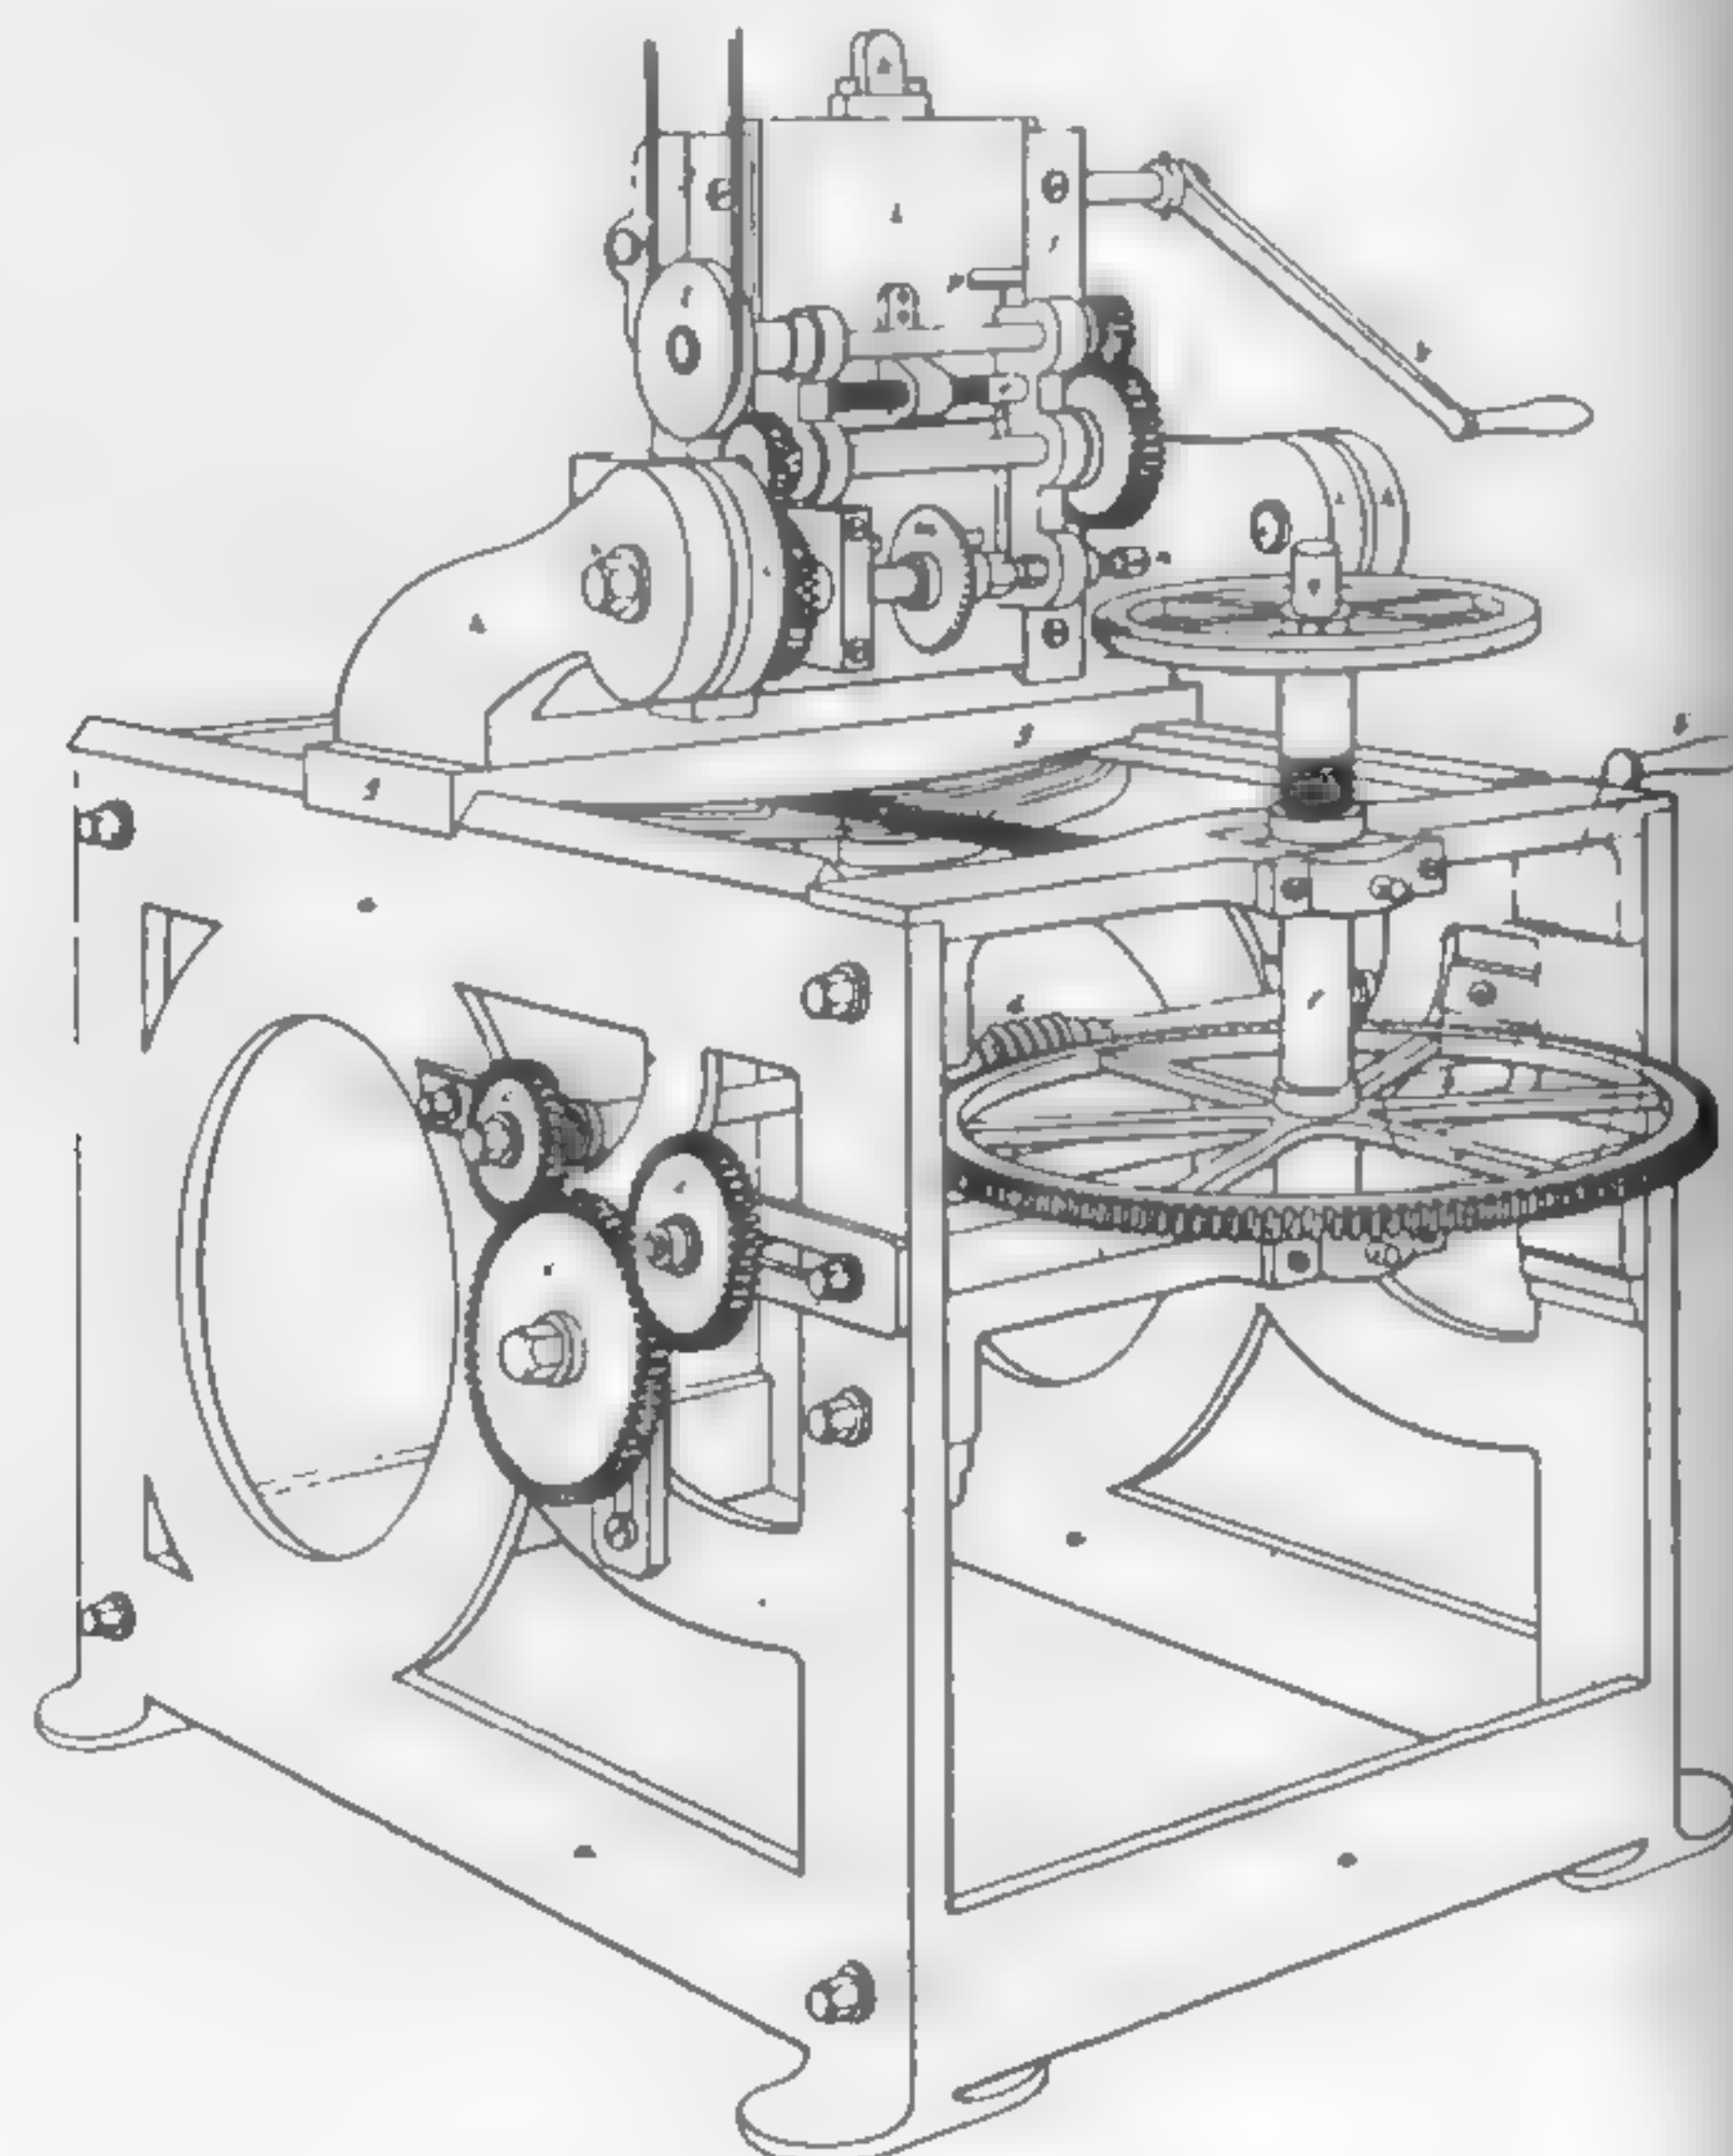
LEWIS' GEAR-CUTTING MACHINE
